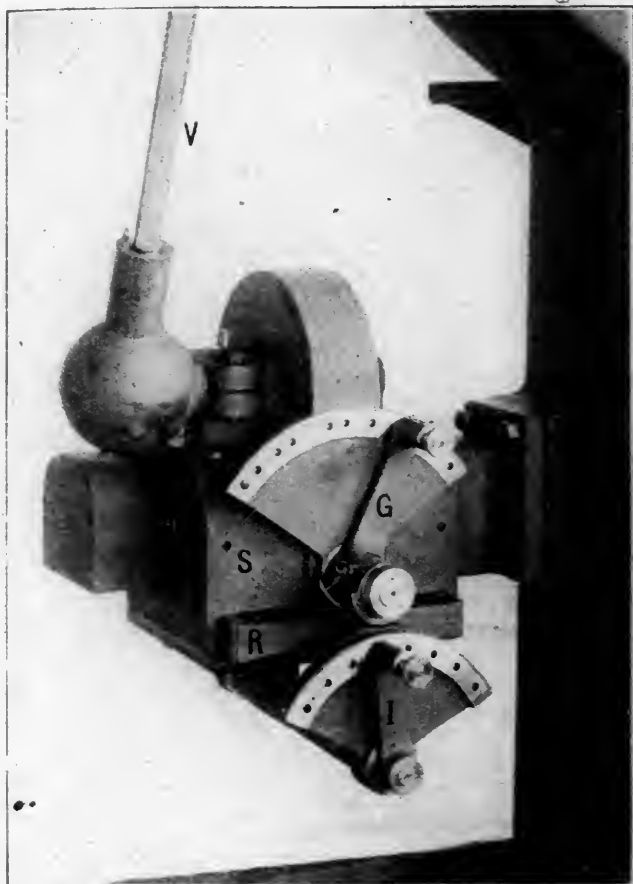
FRONT VIEW OF LOWER GEAR BOX.
